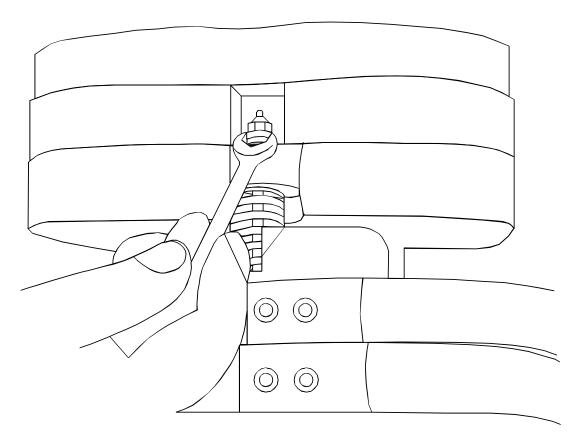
SHOULDER PLATE ASSEMBLY, SID-063
